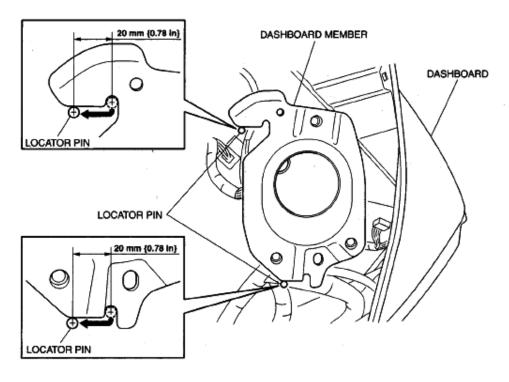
Identifying Dashboard & Dashboard Member Courtesy of MAZDA MOTORS CORP.
